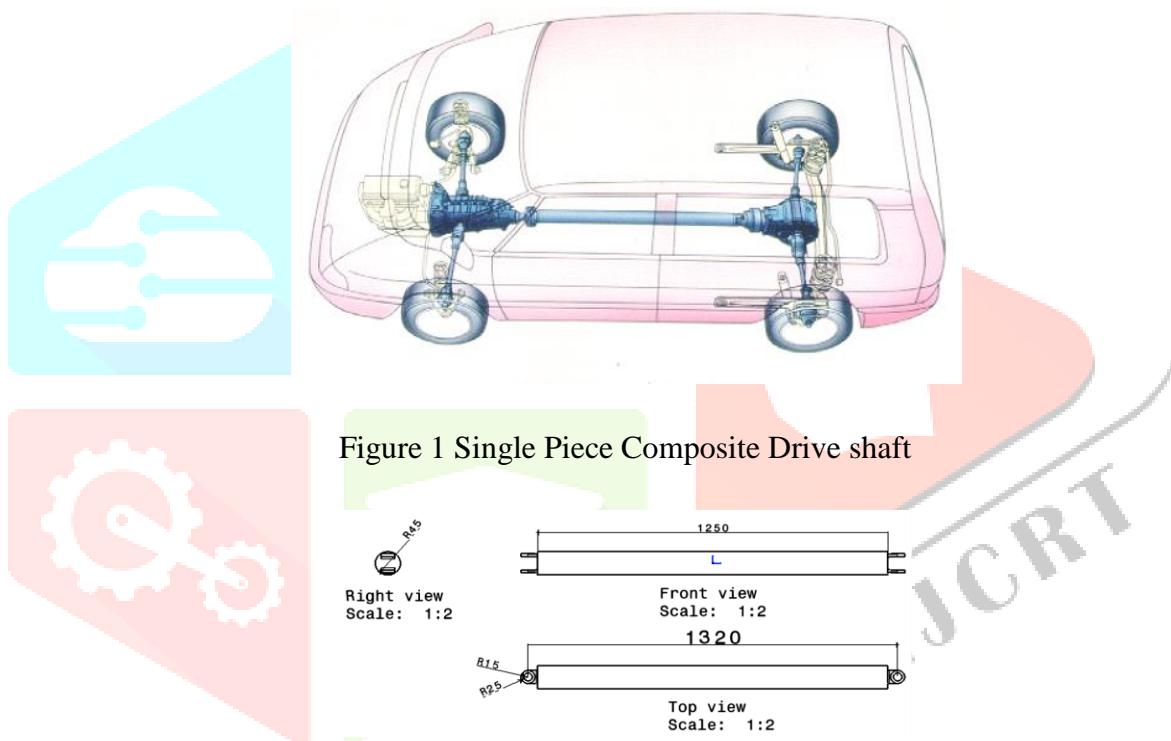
2D Drawing of Single piece composite hollow Drive Shaft
